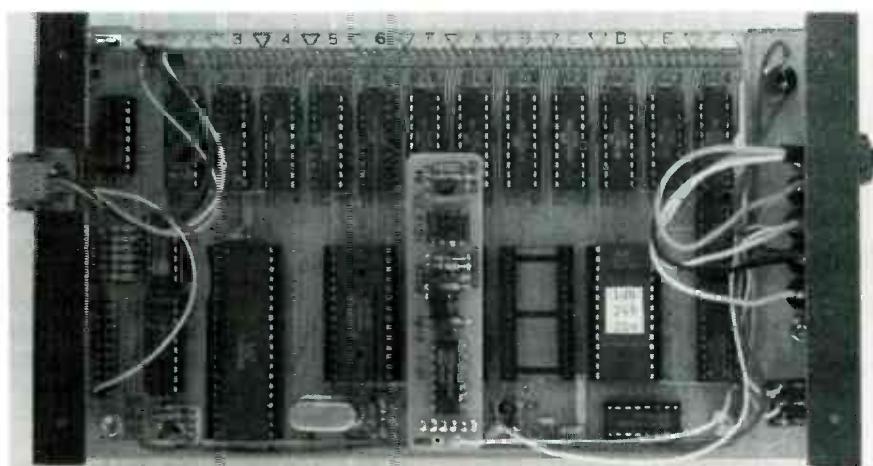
THE EPROM BOARD mounts on the main board and rides about 1/2" above the EPROM that is being programmed.
